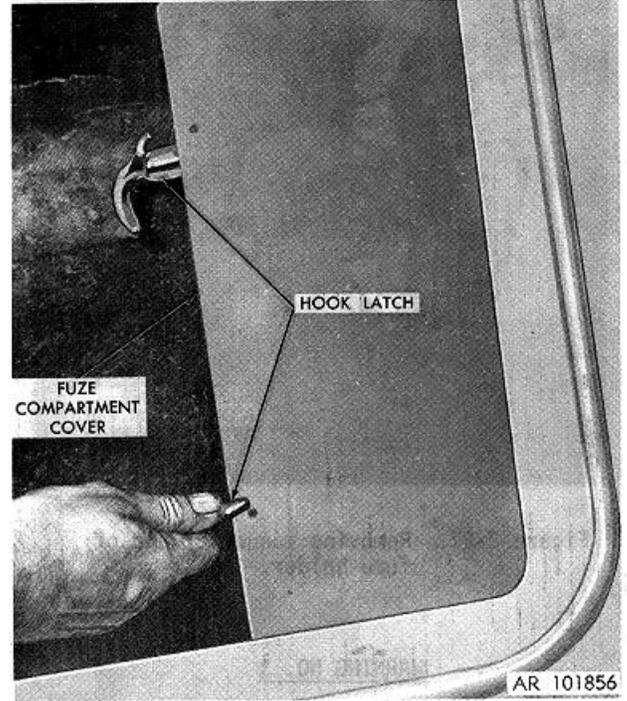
Lifting and swinging hook latch of fuze compartment cover.
